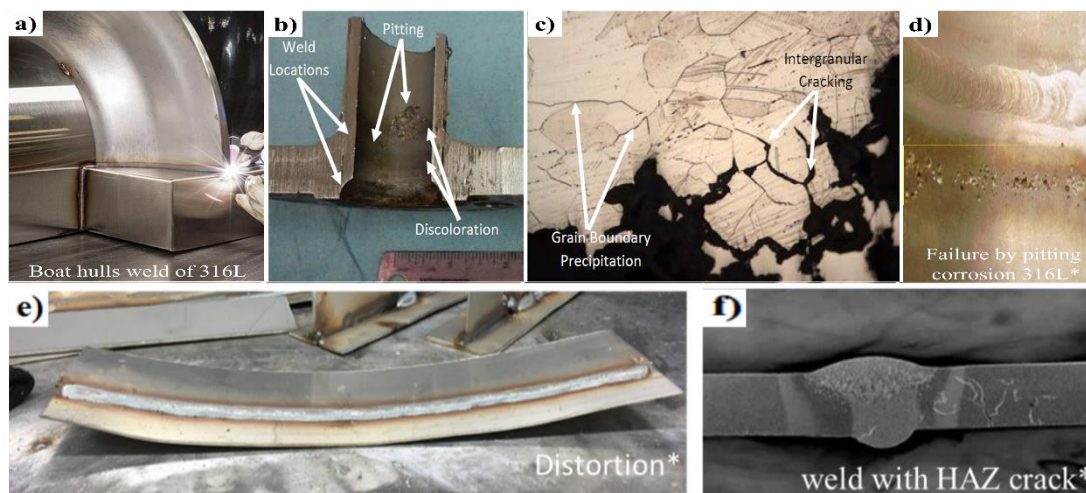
Application of 316L SS in a) Boat hulls, b) Discolouration, c) Intergranular cracking, d) Pitting, e) Distortion, f) Failure in HAZ. [15, 16] Copyright (2020) Weldinganswers.com
